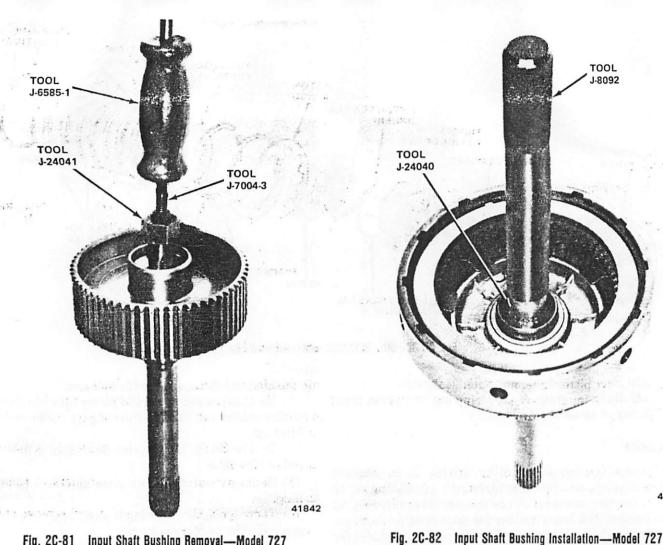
C-81 Input Shaft Bushing Removal—Model 727
